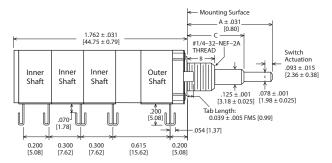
SHA13: Concentric Shafts, Solder Hook, 3 Potentiometer(s) or RS + PP, 1/4" Bushing
